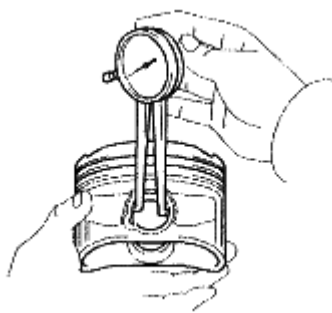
Measuring Inside Diameter Of Piston Pin Hole Using Caliper Gauge
